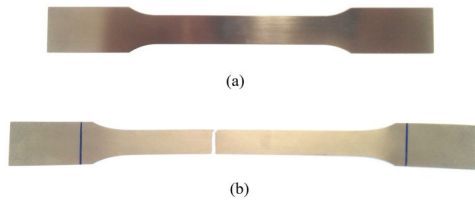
Inconel 718 0.36 mm thick sheet uniaxial tensile specimens: (a) unformed and (b) fractured conditions
